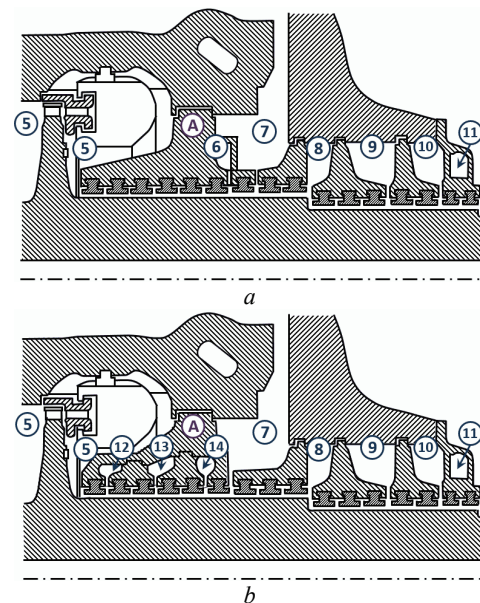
Front End Seals Design: (a) Baseline; (b) Modified
